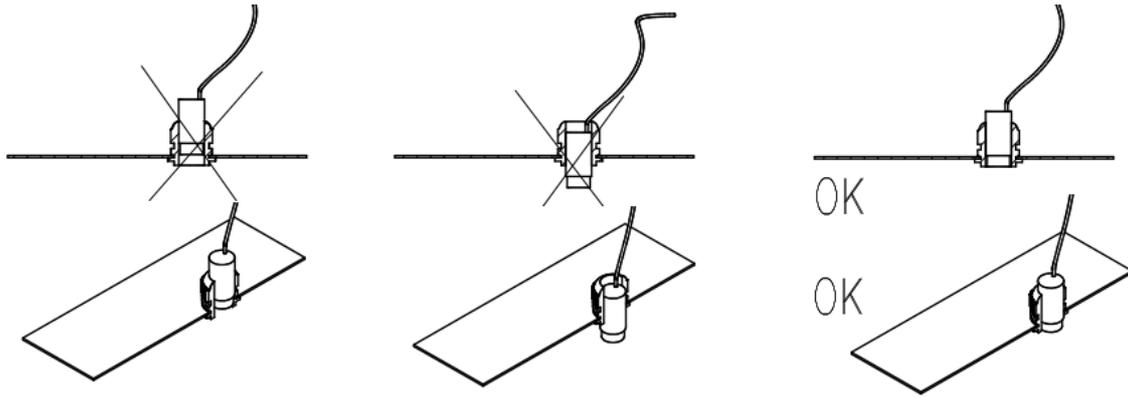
Proper setting of the capacitive sensor in the mounting socket.
